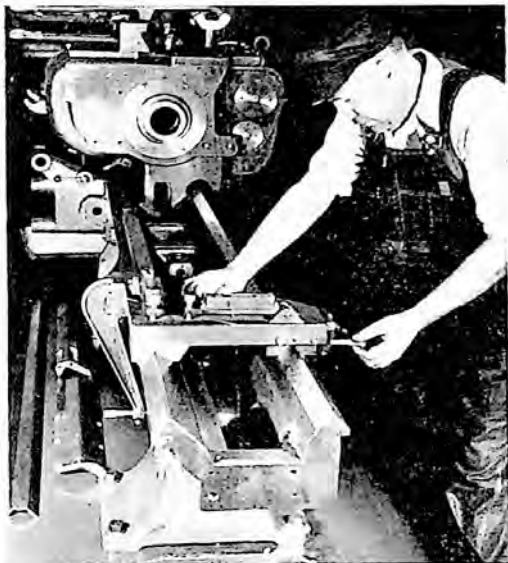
Fixture Used for Aligning Turret Lathe Bed
